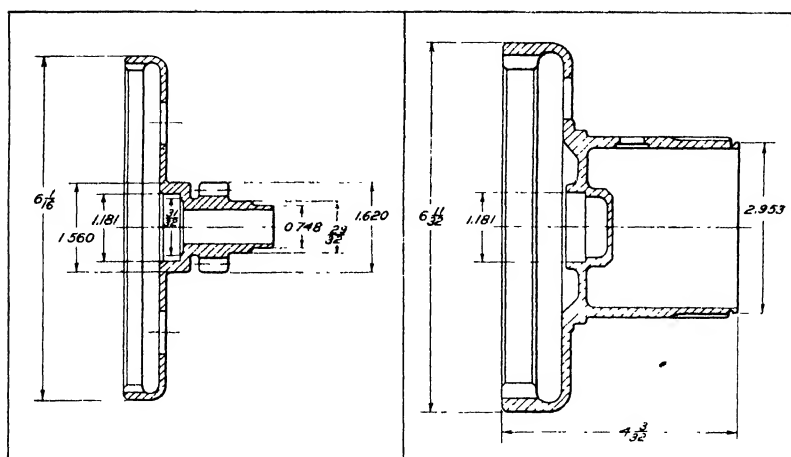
(Left) Cross-section of Gear for Aircraft Controllable-pitch Propellers. Fig. 4. (Right) Cross-section of Another Gear Used in Aircraft Controllable-pitch Propeller Assemblies
